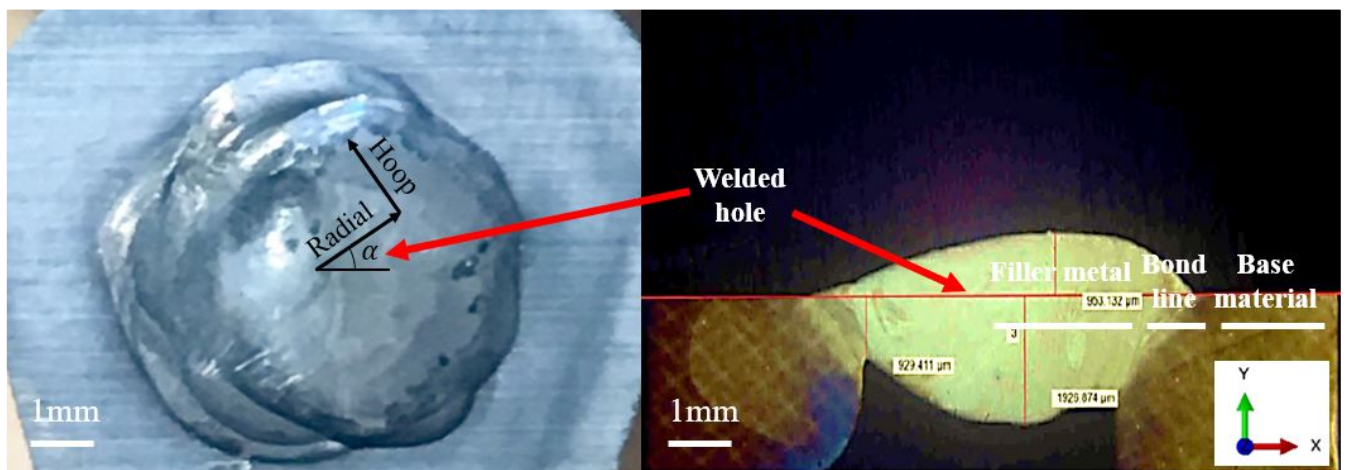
The overall geometry of the welded specimen with arrows showing the weld infill (left), and a cross-section view through the weldment (right).
